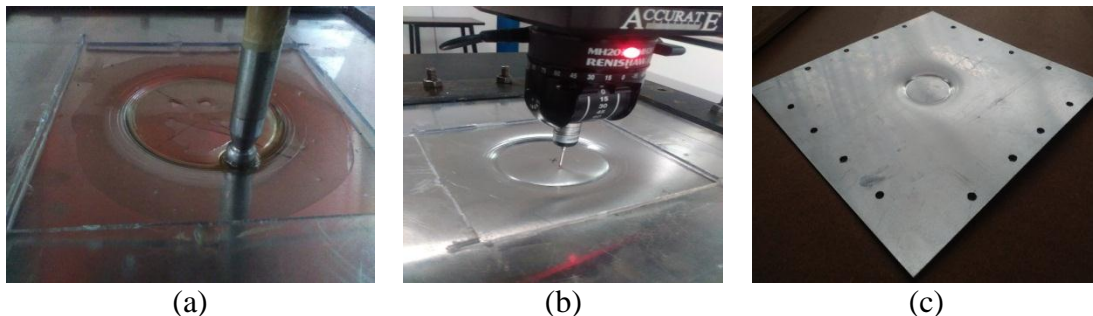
(a) Forming upto fillet end, (b) measuring in clamped position and (c) sheet after unclamping for first stage
